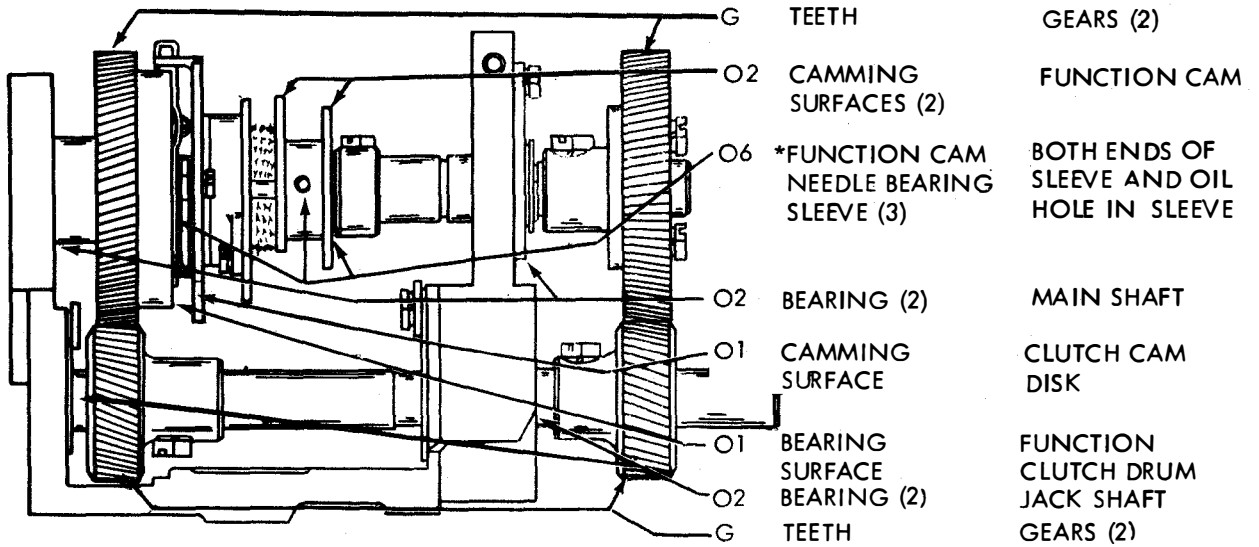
Main Shaft and Jack Shaft Mechanisms, Two-Shaft Units (Line Drawing)
